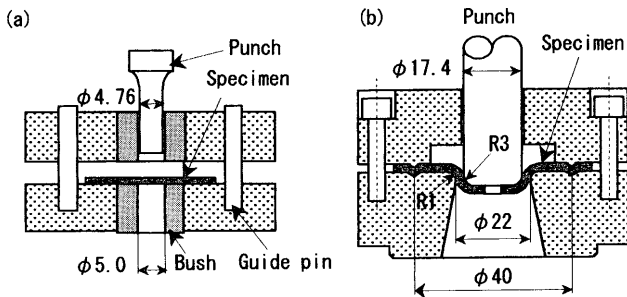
Experimental apparatus for (a) hole-punching and (b) hole-expanding.
